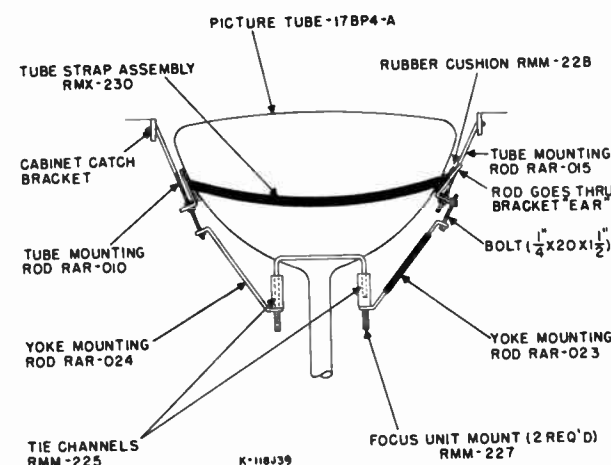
Picture Tube Assembly, Model 17C125 (Top View) (Yoke and Focus Unit Not Shown)
